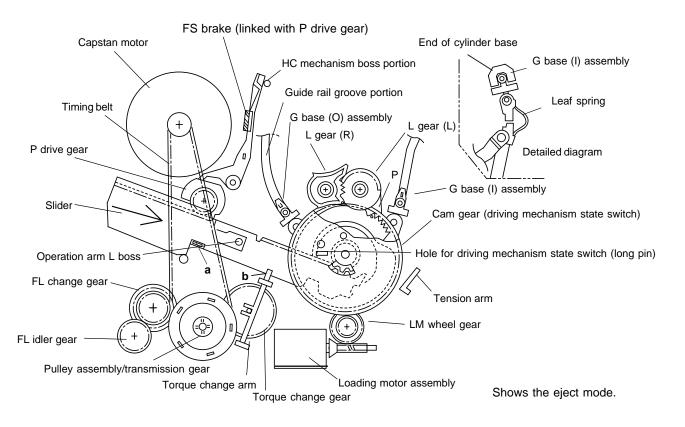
Loading Mechanism Drive Mechanism (Back View)
